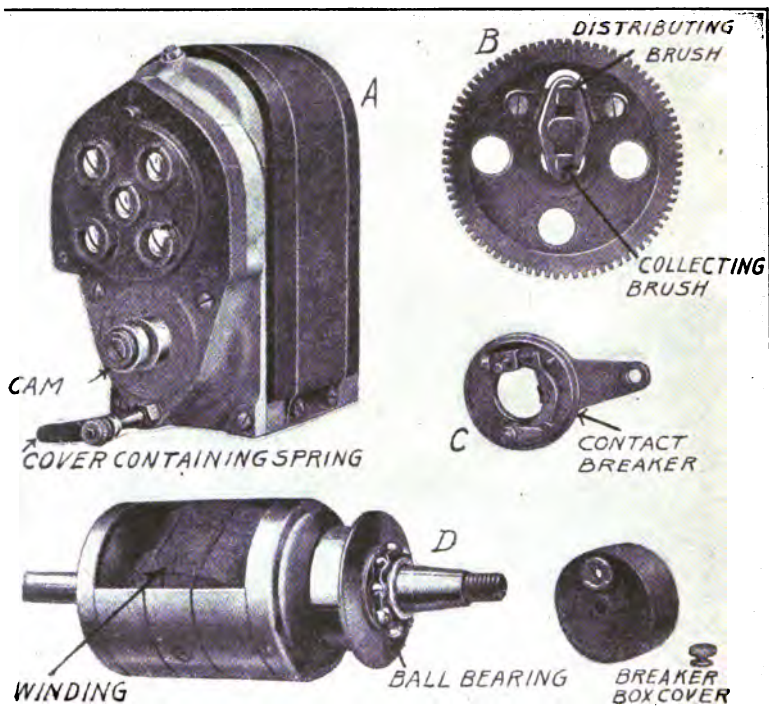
Bemy Magneto Using Conventional Rotary Winding on H or Shuttle Armature and Parts of Contact Breaker and Distributor.
